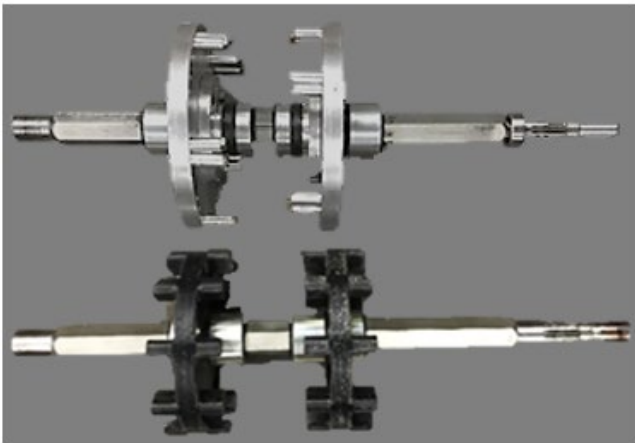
Prototype 10 Tooth Alternating Drivers (Top) and OEM Drivers
